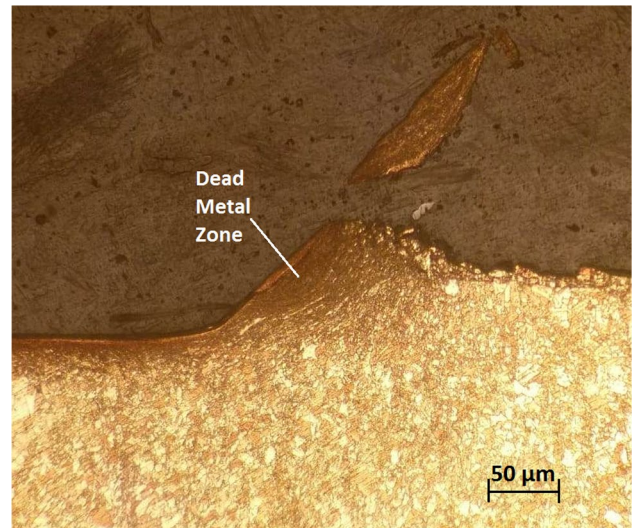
Microscopic image of the cutting zone of workpiece (Cutting speed: 0.5 m/min, depth of cut: 50 μm, rake angle: -50°)
